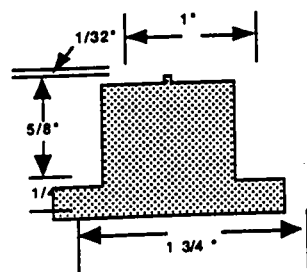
Sensing Chamber Mold components. A) Top plug
